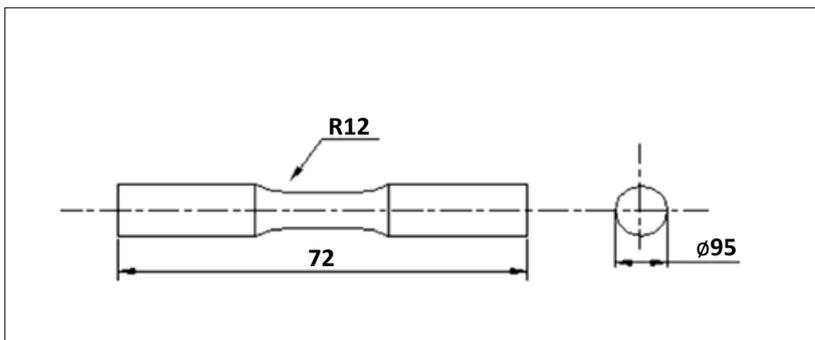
Dimensions of green compact for rotating bend fatigue test-piece (mm) [1]
